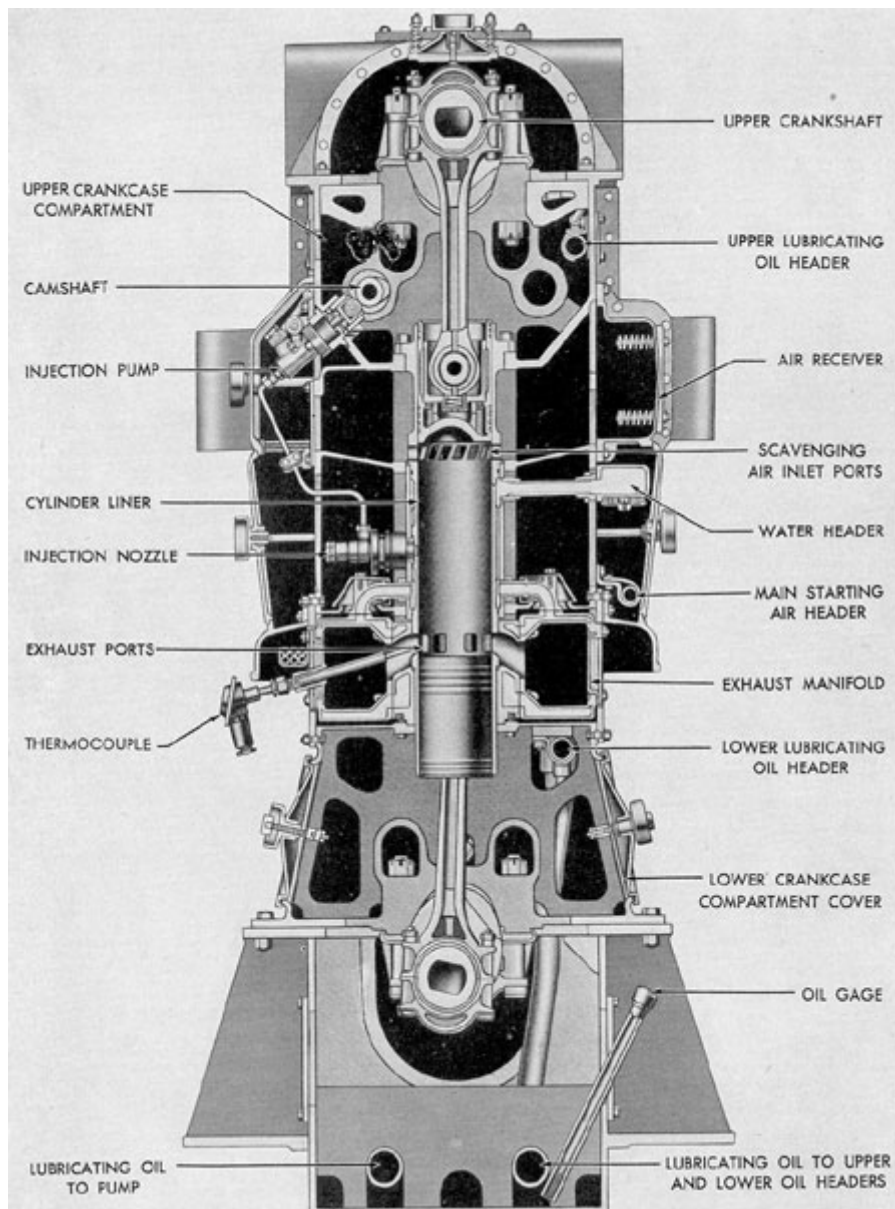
Transverse cross section of 7-cylinder F-M auxiliary engine.
